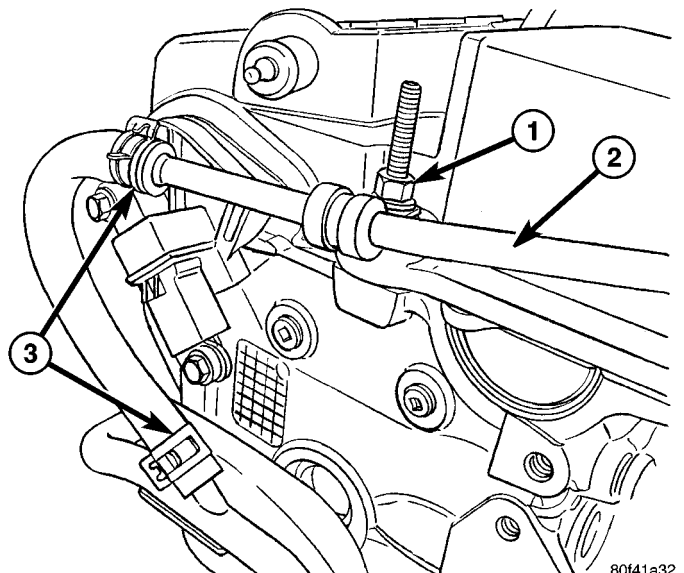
PCV/Make-up Air Hoses & Ignition Coil
